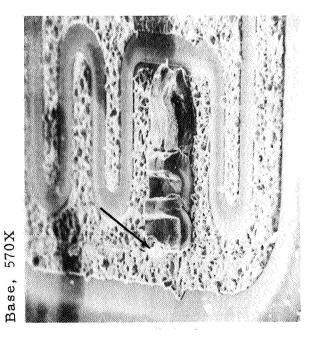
Manufacturer "B" 2N2222A, Serial Number 76, Die Side Bond, Ultrasonic. Open at The Heel After 18,000 Power Cycles
